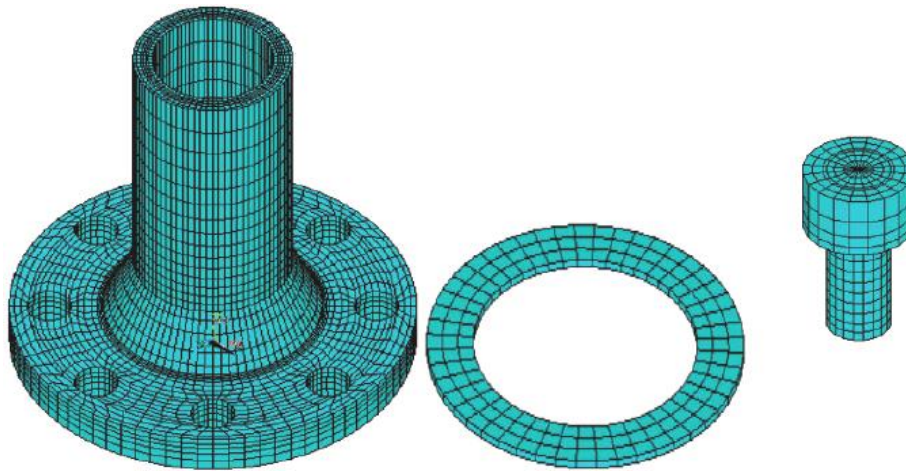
Finite Element model of a bolted joint (flange, gasket and bolt)
